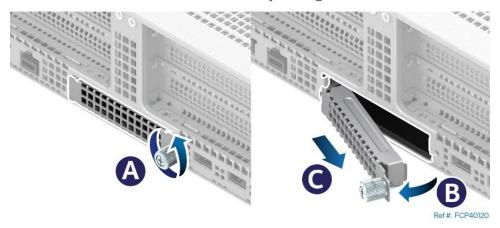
OCP* Module Bay Filler Removal (2U System Shown)
